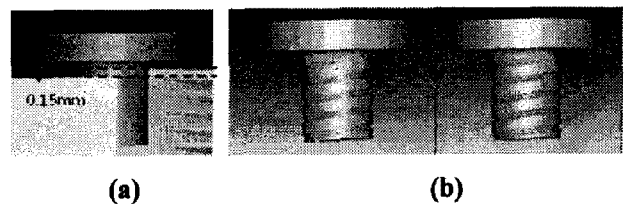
Effects of dies position; (a) Modified dies position; (b) Deformed shape
